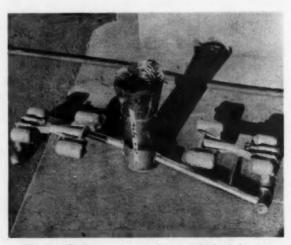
Casting setup to show method of bottom gating and reversal of direction in centrifugal casting technique.
